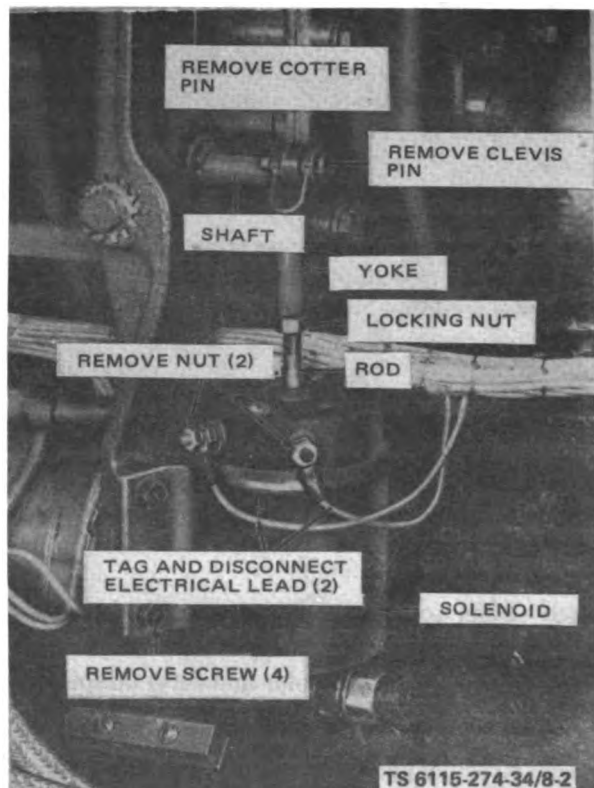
Air Intake Housing Solenoid, Removal and Installation
